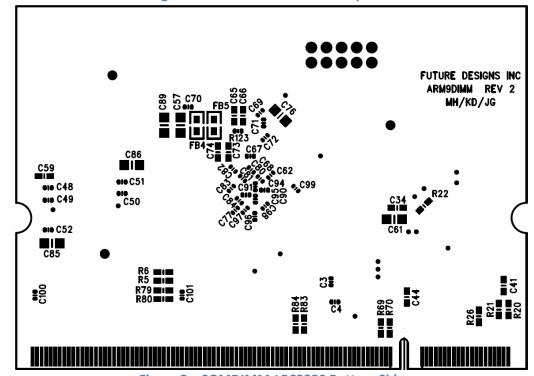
SOMDIMM-LPC3250 Bottom Side
